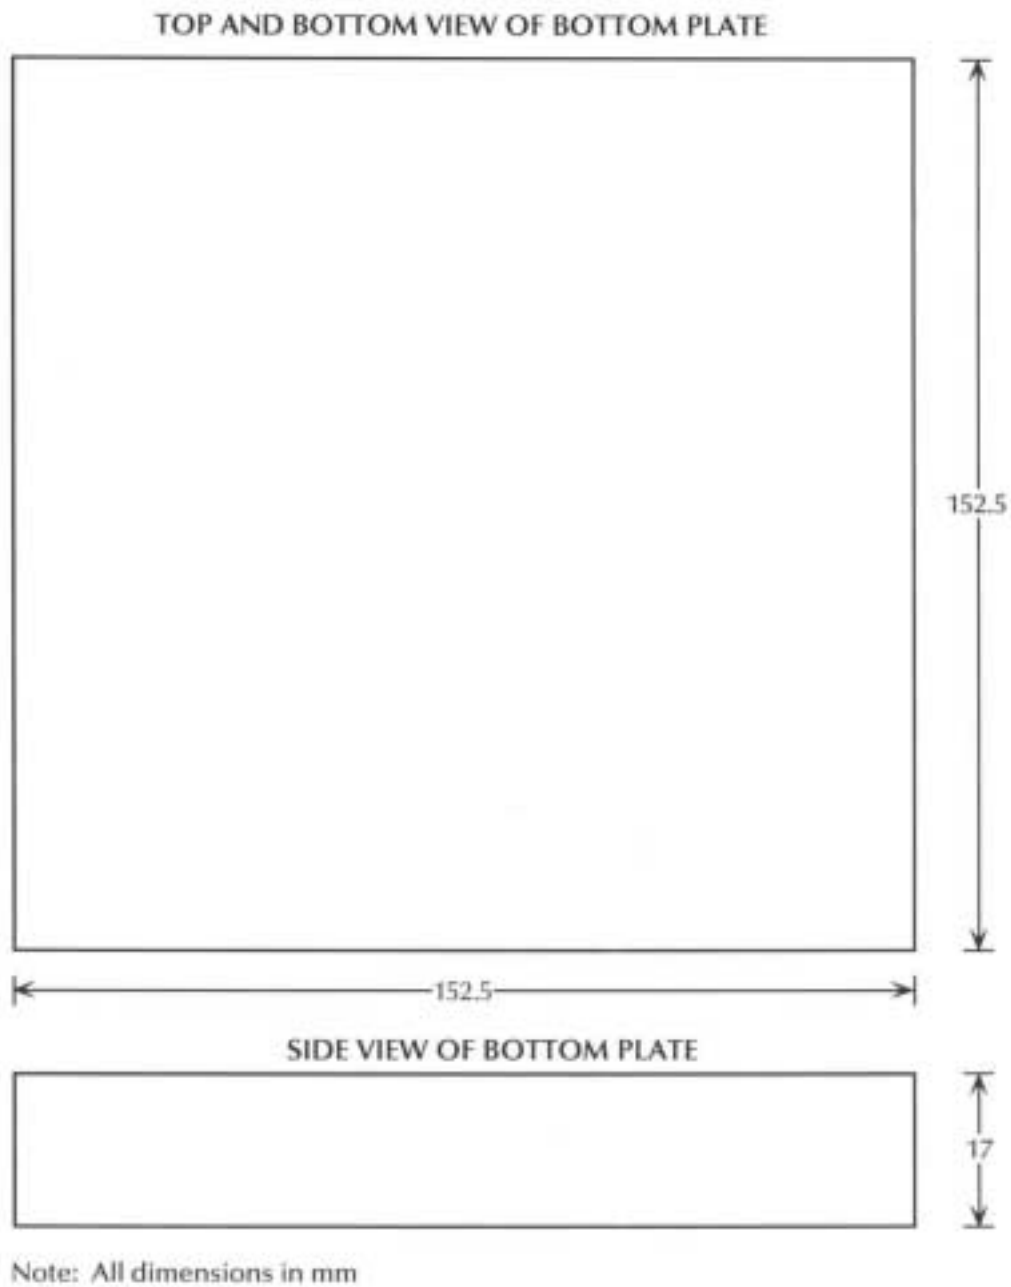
Schematic of bottom piece of machined aluminum flaw plate #3 with six flaws.
